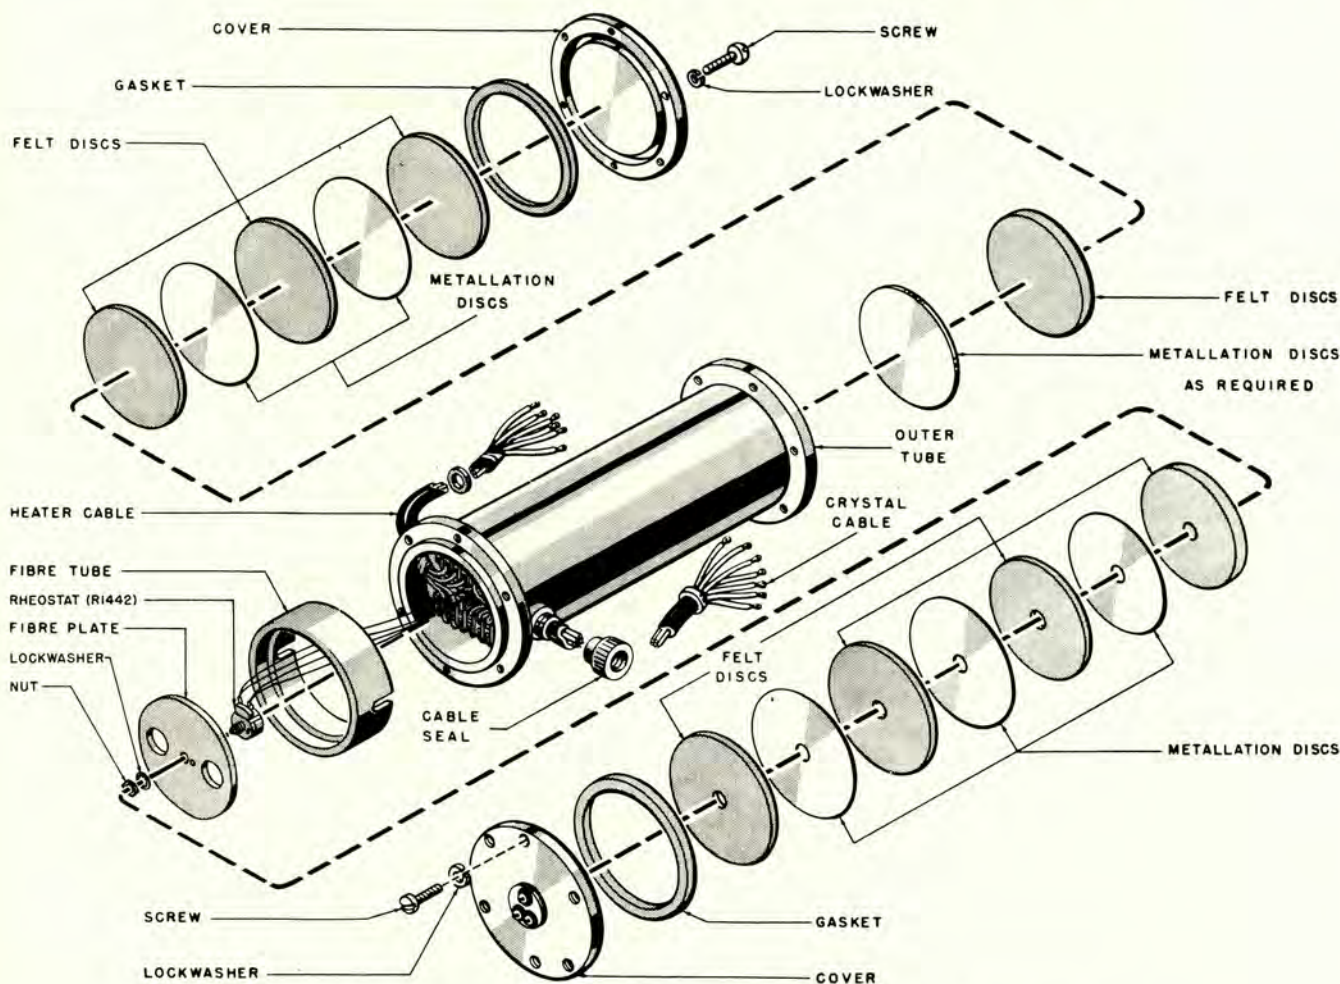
Exploded View of Oven Assembly, Showing Construction of the Major Container
